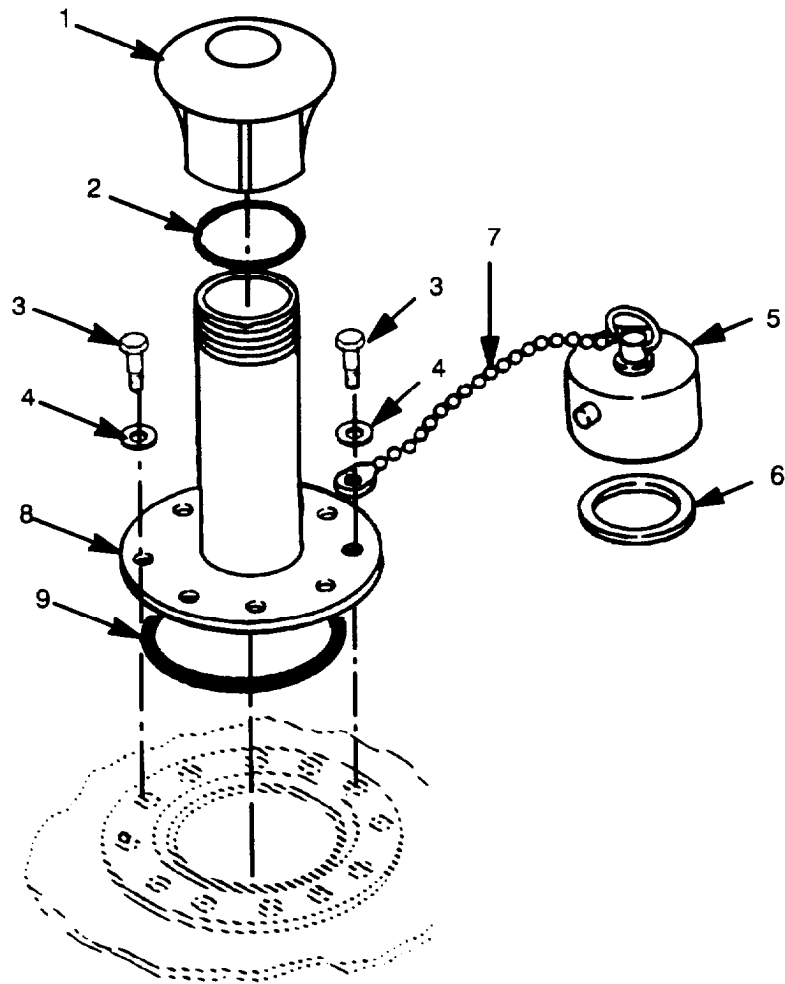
Vent Fitting Assembly (Models 91011-1 & 91005-1)
